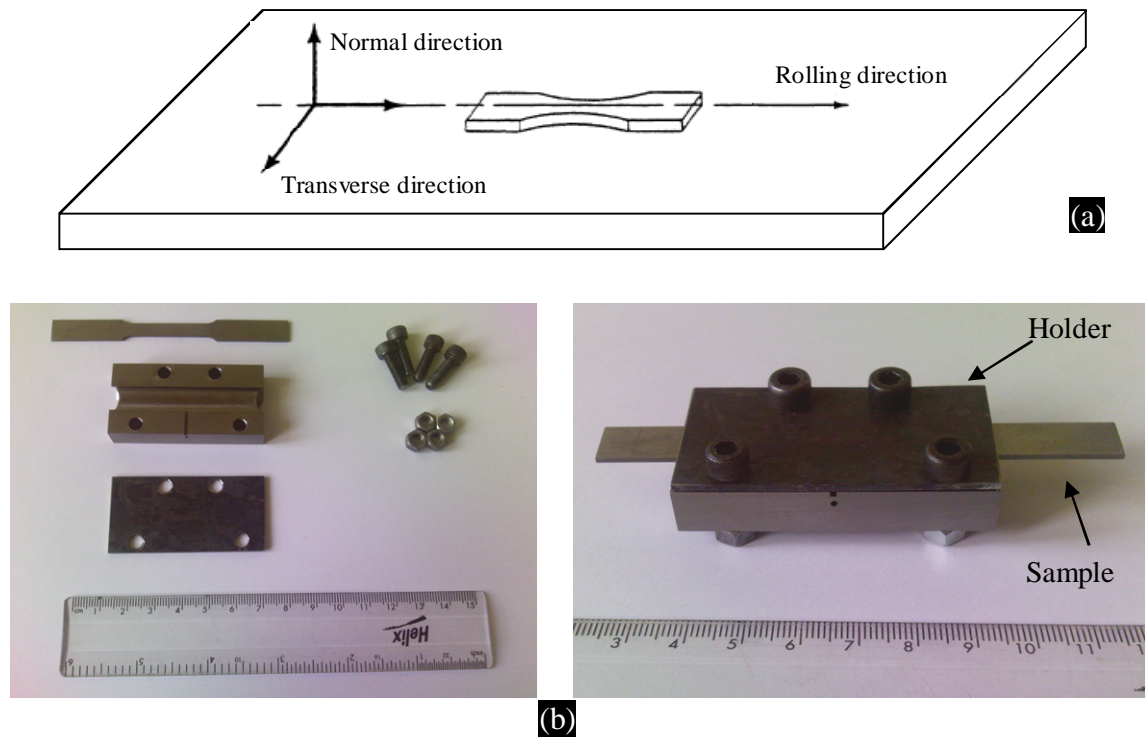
, Dog bone shape standard sample for the tensile testing, (a) The selected direction for the sample preparation, (b) Sub size sample dimensions according ASTM E8/E8M and illustration of sample holder used to heat treat the sample by FTTU.
